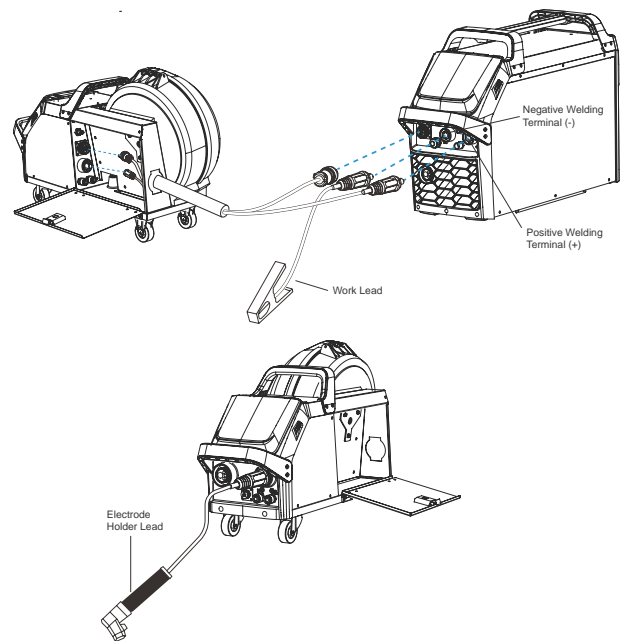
Setup For STICK (MMAW) Welding
